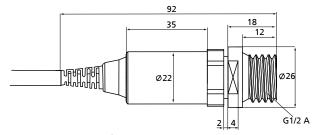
Dimensions of sensor, measuring range 65 bar and above
